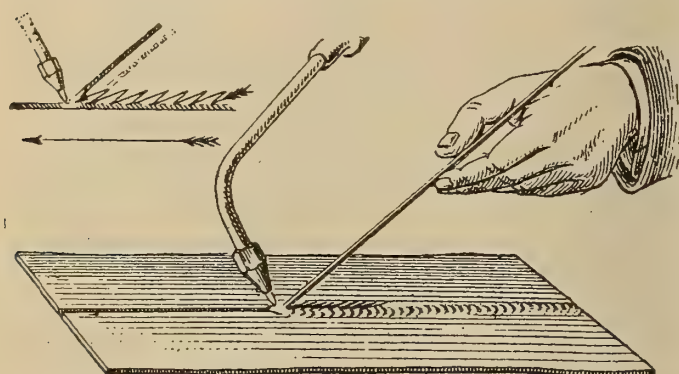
WELDING OF THICK SHEETS OF METAL
